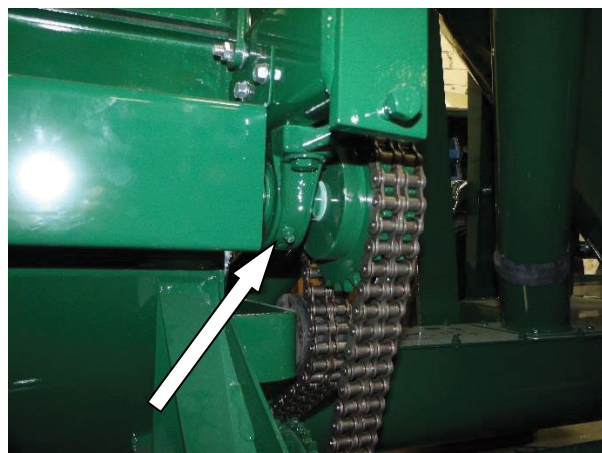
Jack Shaft Rear Bearing (Shield Removed For Clarity).
